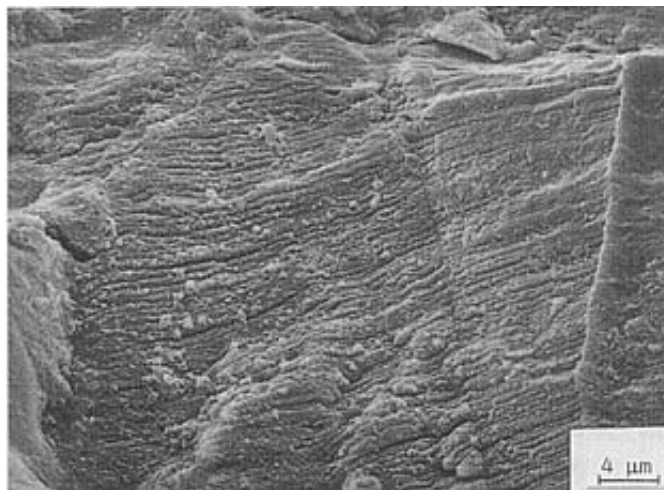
Fracture surface of a reverse bending fatigue failure
